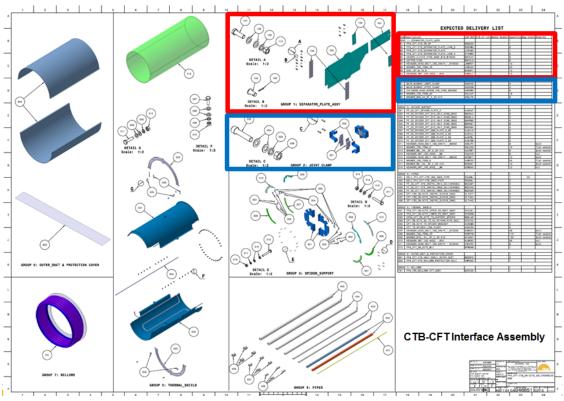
Example of Kitting for Magnet Feeder CTB-CFT Interface Assembly
